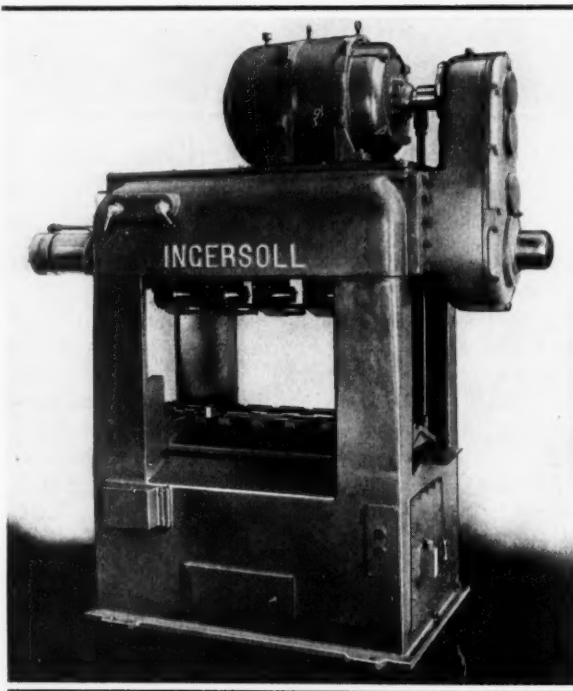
Ingersoll Machine which Employs Stub Tools for Boring Camshaft and Crankshaft Bearing Holes in Cylinder Blocks
